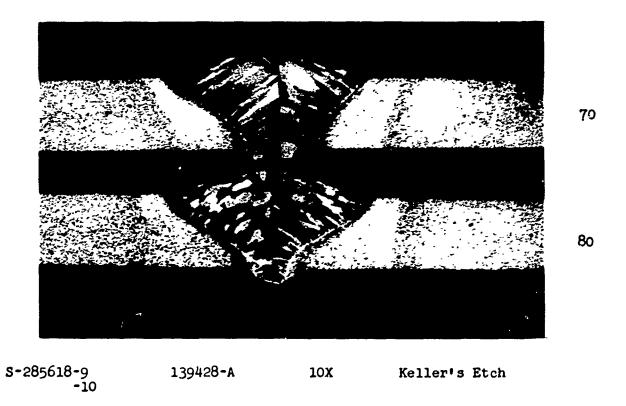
DCRP-GMA welds in .090-in. 2014-T6 sheet showing changes in bead shape with increasing weld travel speed
